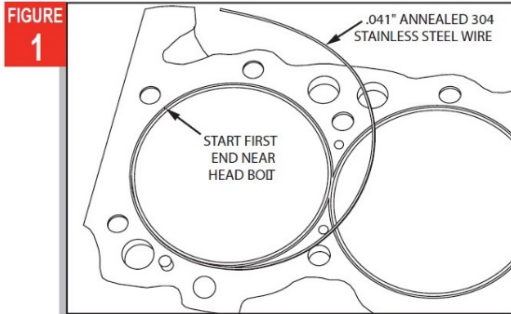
Trial fit and cut wire to approximate length +1.00". Using pliers and a fine mill file, square the starting end and insert near a head bolt.
